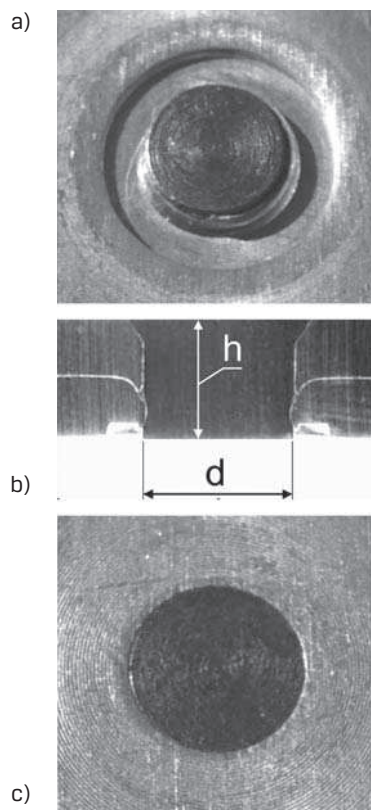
Aluminum sheet plate joint using the SolidRivet self-pierce riveting: a) support side (die contact side) view, b) joint cross section, c) rivet head view.
